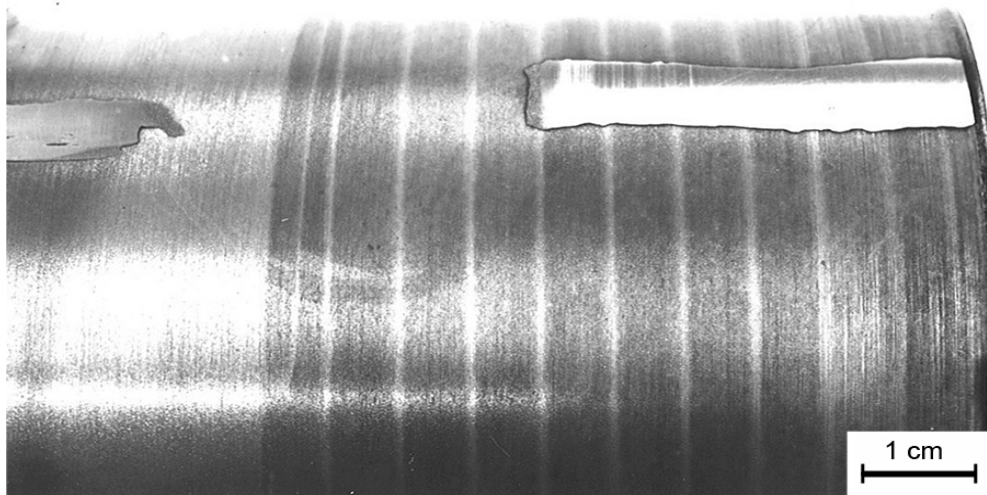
Case History 20.5.2 – Helical Dark Etching Bands Indicating Grinding Damage of the Steel Surface of the Lower Part of the Cylindrical Section (note the irregular areas with retained hard-chromium plate).
